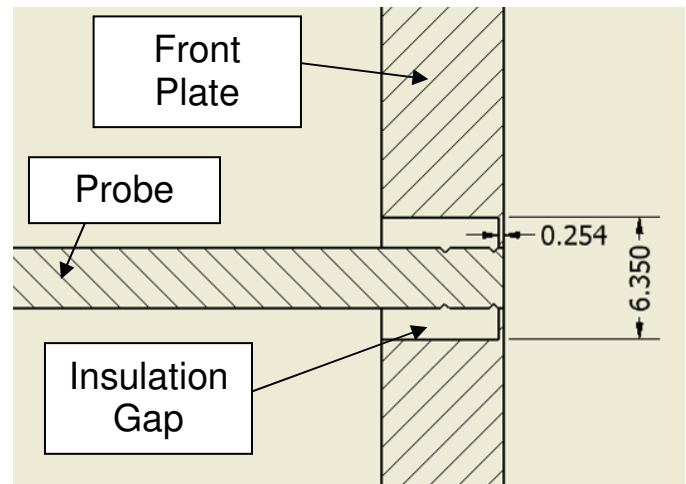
Section view of face plate and probe to illustrate plate dimensions.
